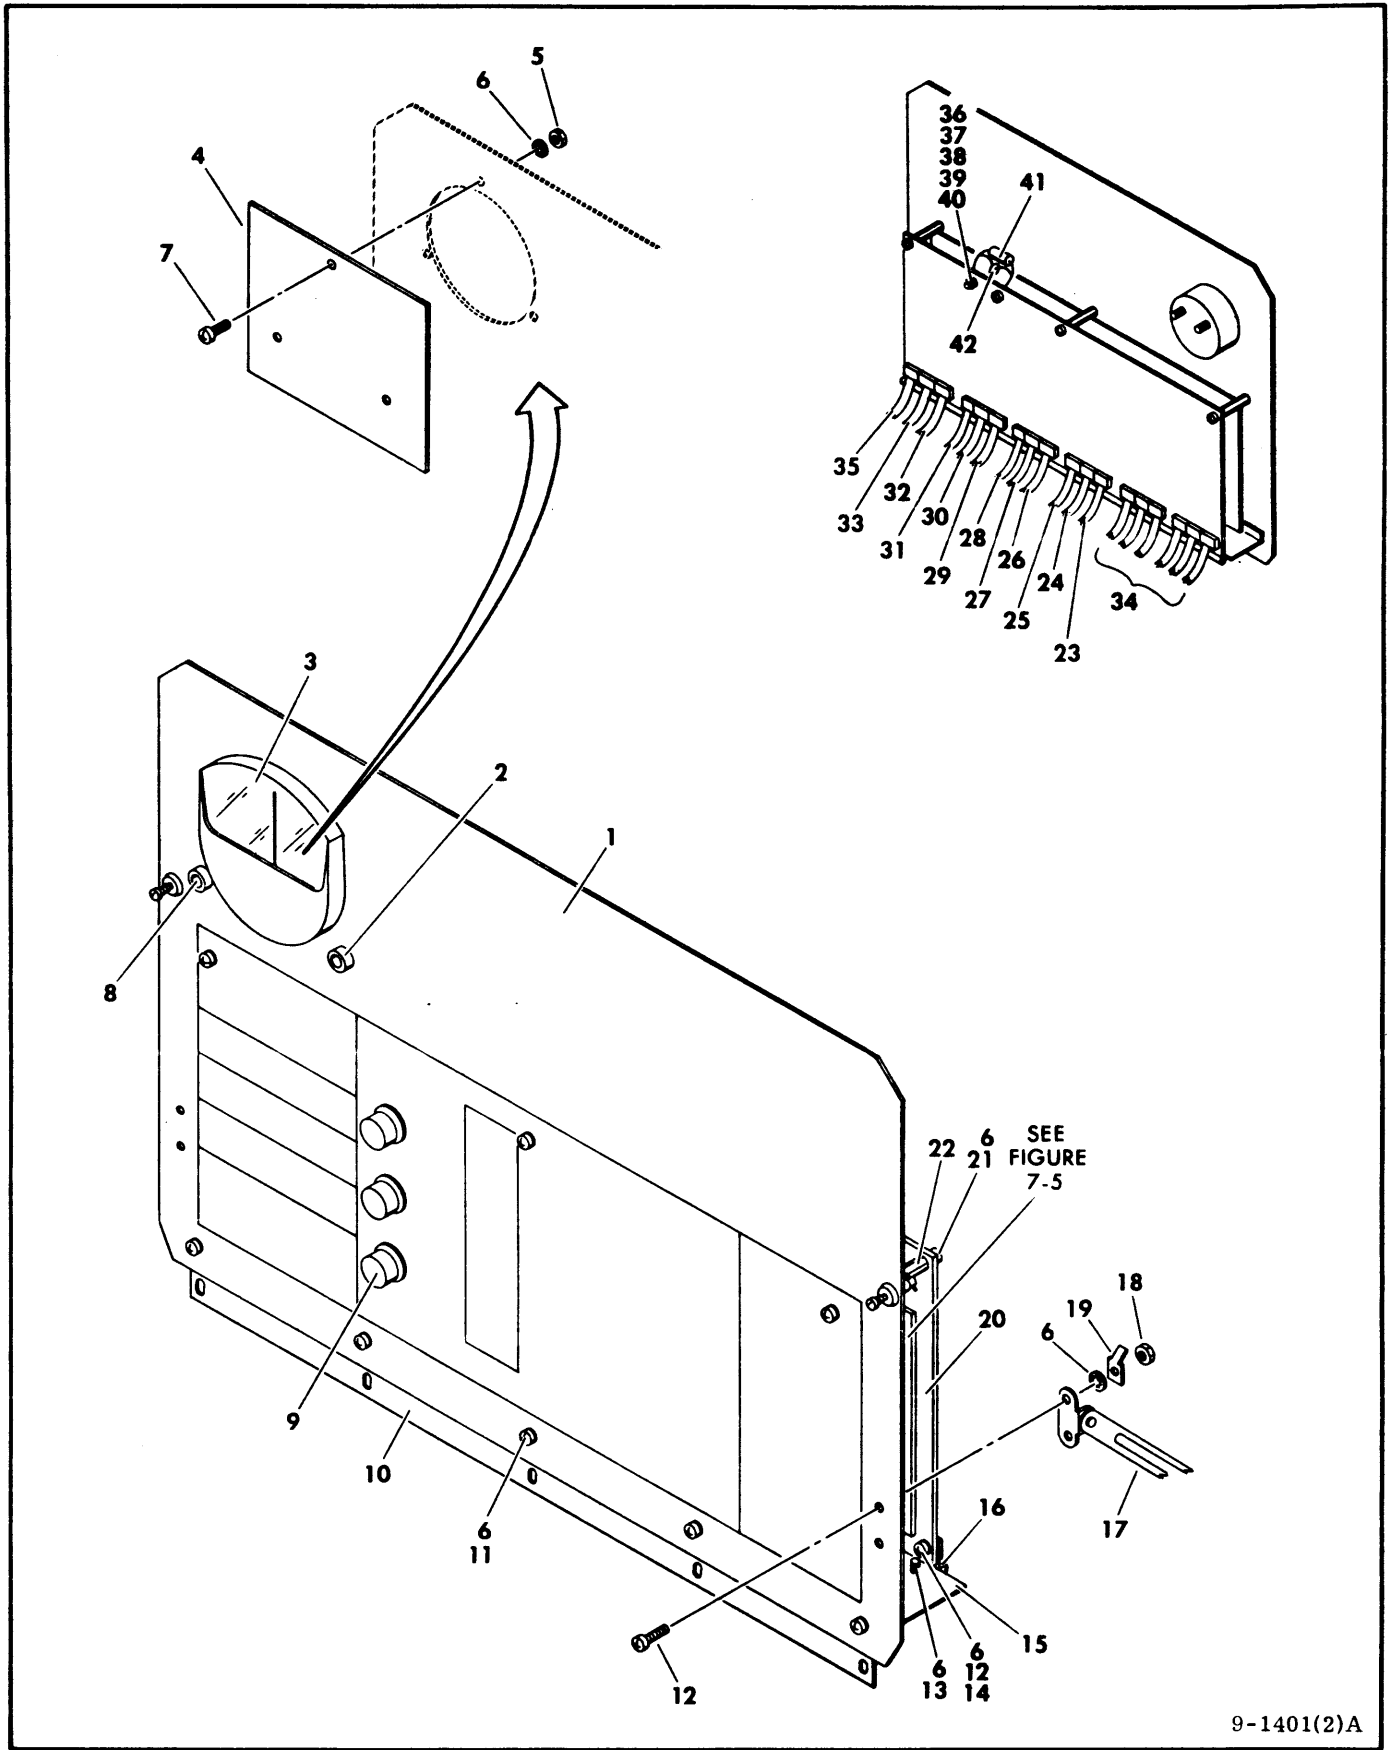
FINAL ASSEMBLY, RUGGEDIZED PACKAGE
